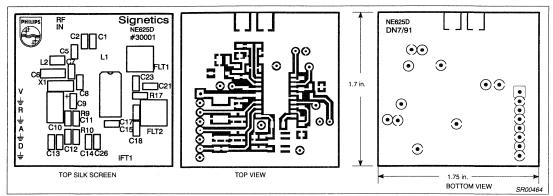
NE625 SO Demo-board Layout (Not Actual Size)
